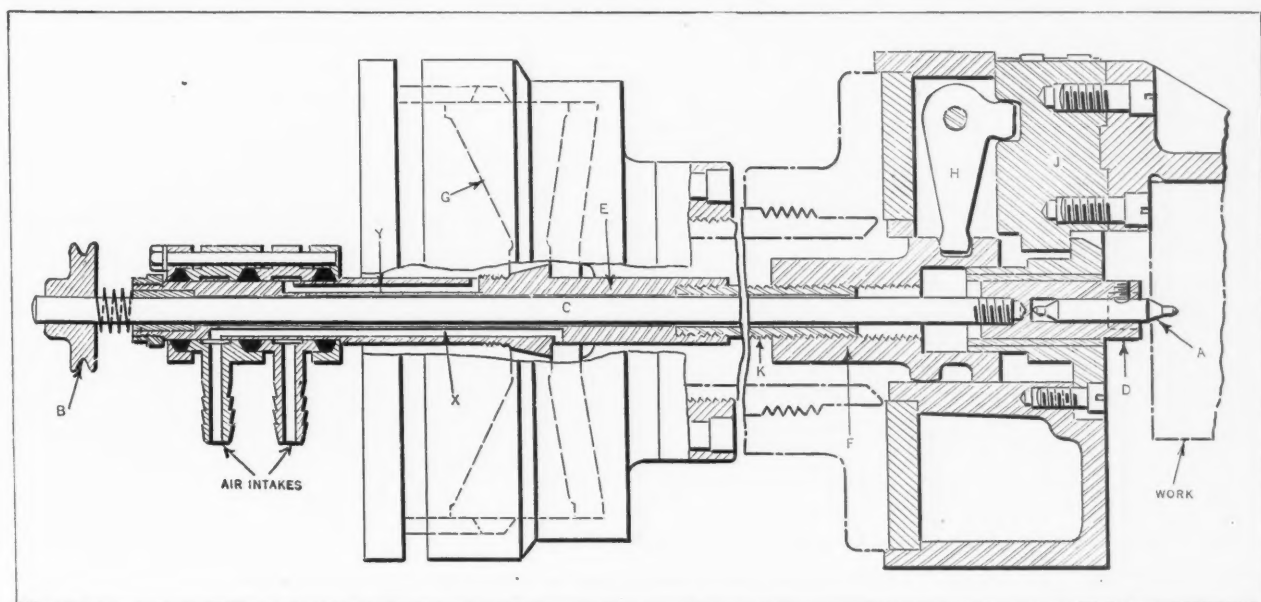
Chuck that Permits Pistons to be Center-drilled and Countersunk during a Standard Lathe Operation
